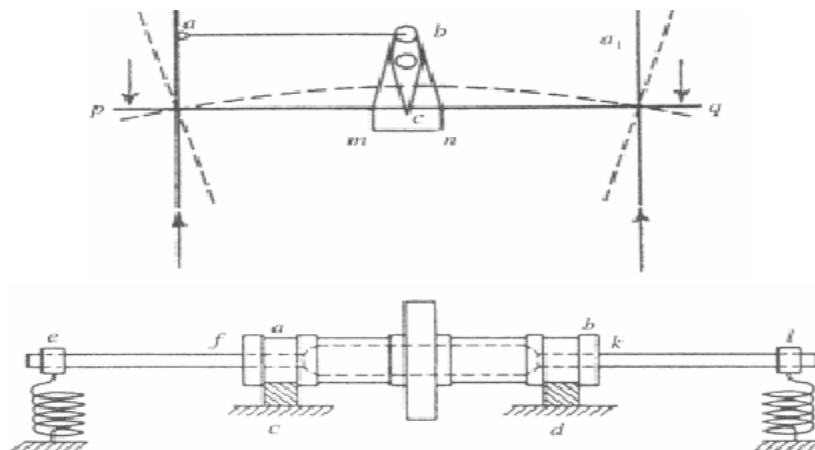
3: Wholer's apparatus fatigue testing machine [10]
